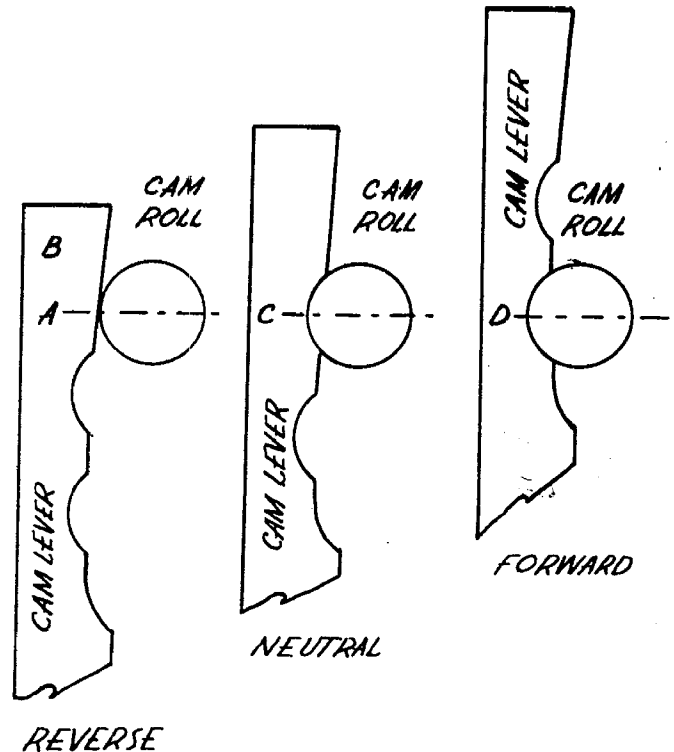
Reverse Gear - Cam Adjustment - Joes Model
